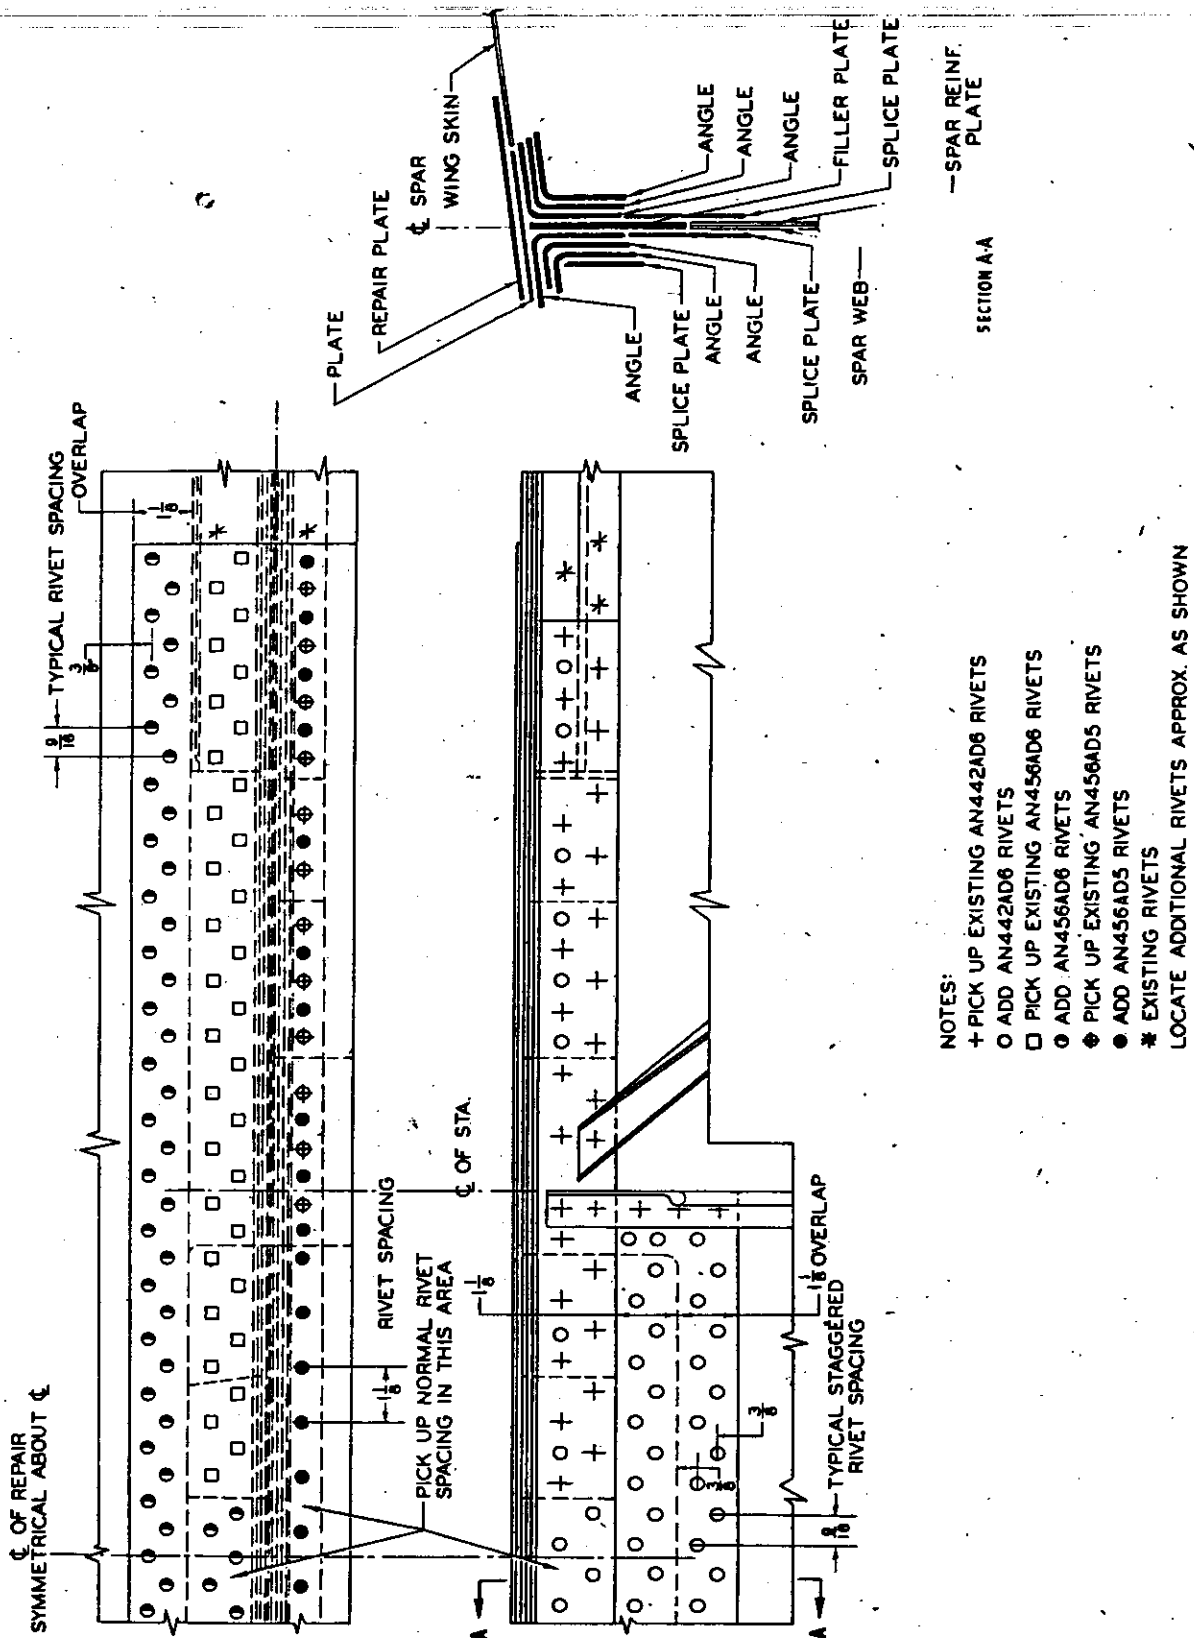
(Sheet 4 of 4 Sheets)—Spar Flange Repair
